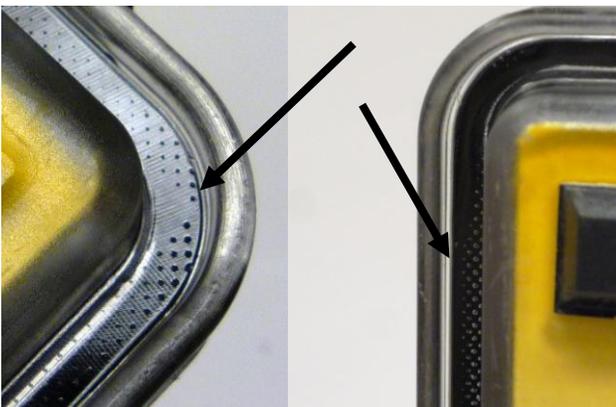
Vibration welding tools often use knurling to grip the parts.
